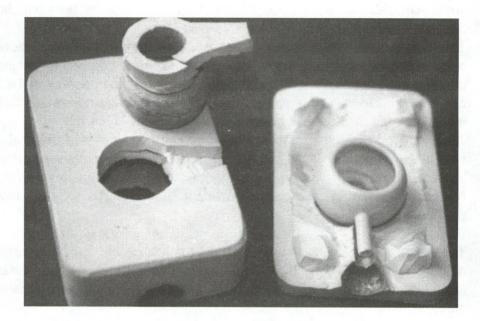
Mold for producing the wax pattern of the ring shown in figure 1 as a single piece
